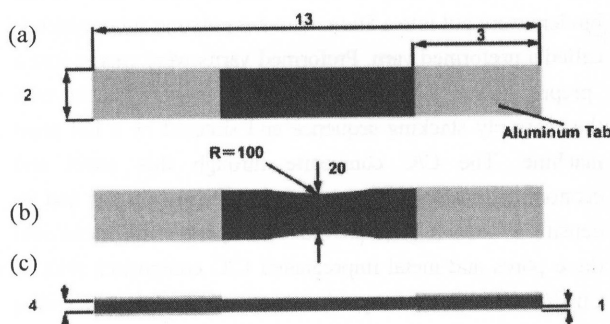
Dimensions of the specimen in mm: (a) C/C and Cu-C/C, (b) Si-C/C, (c) edge view
